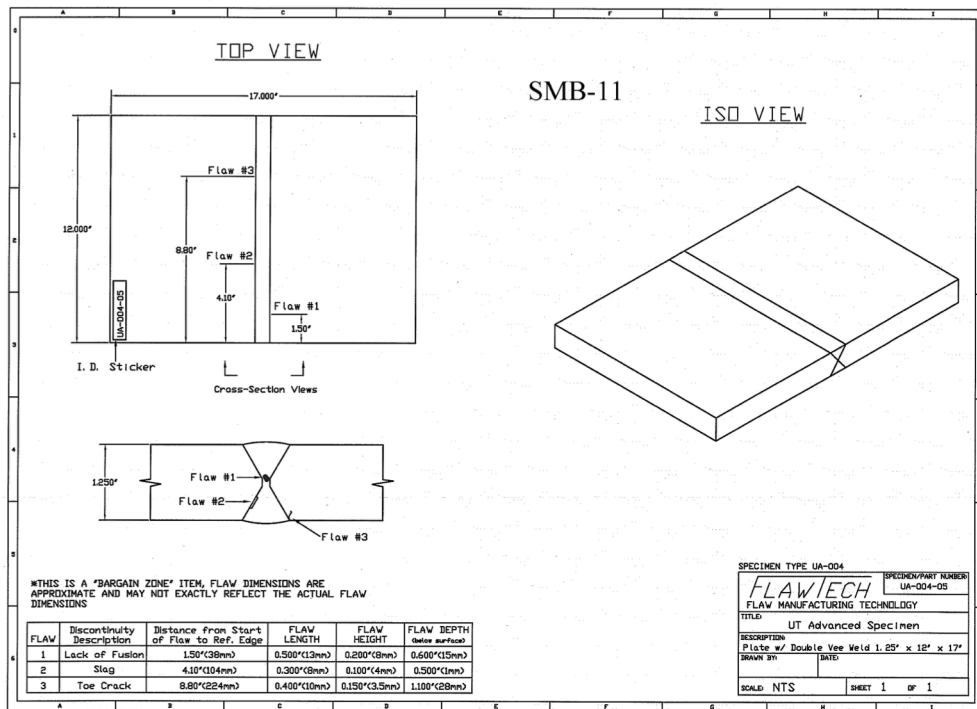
Specimen I design drawing showing type and location of defects in the weld.
